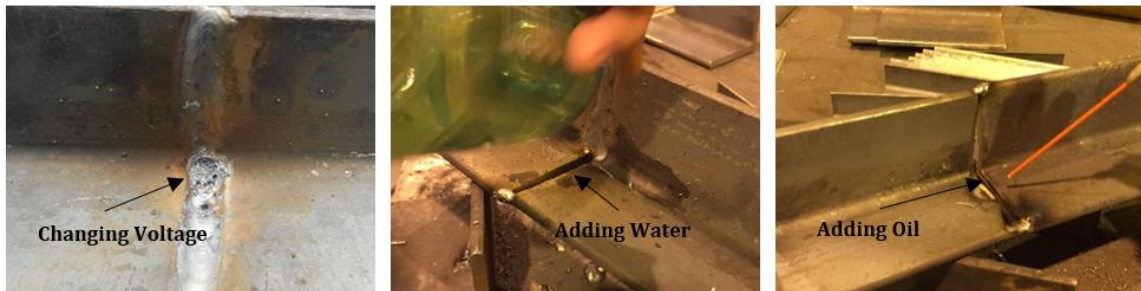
Manufacturing porosity in the welds by changing the voltage (method a), adding water (method b), and adding oil (method c)
